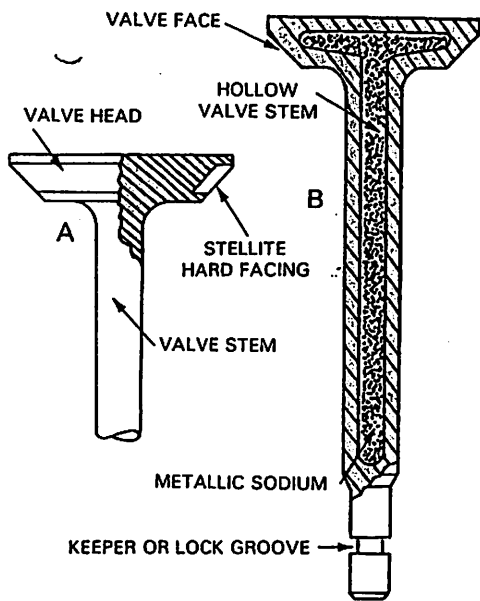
A—Valve with special hard facing to lengthen useful life. B—Special heat resistant valve utilizing a hollow stem partially filled with metallic sodium.
